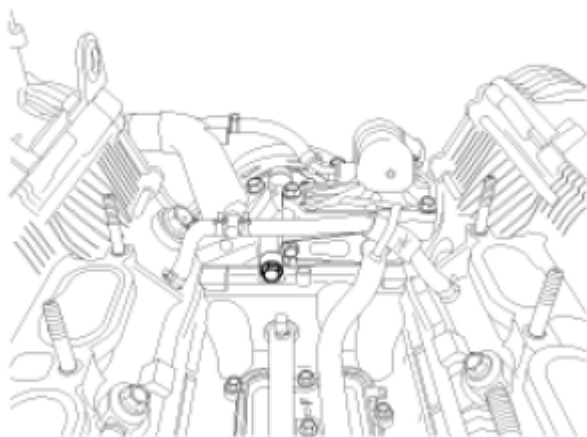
Identifying Hole On Timing Chain Lower Cover (Rear)
